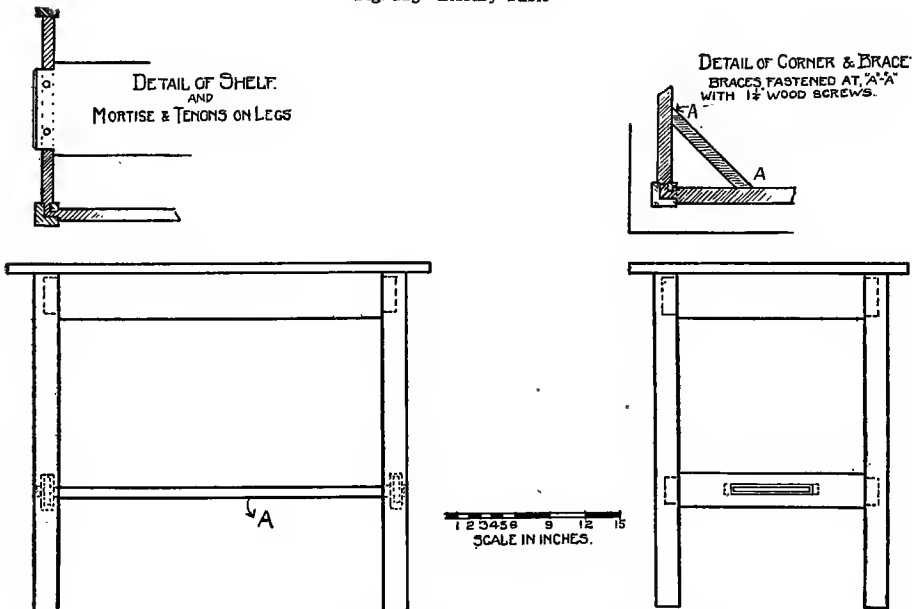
Mechanical Drawing of Library Table without Dimensions
